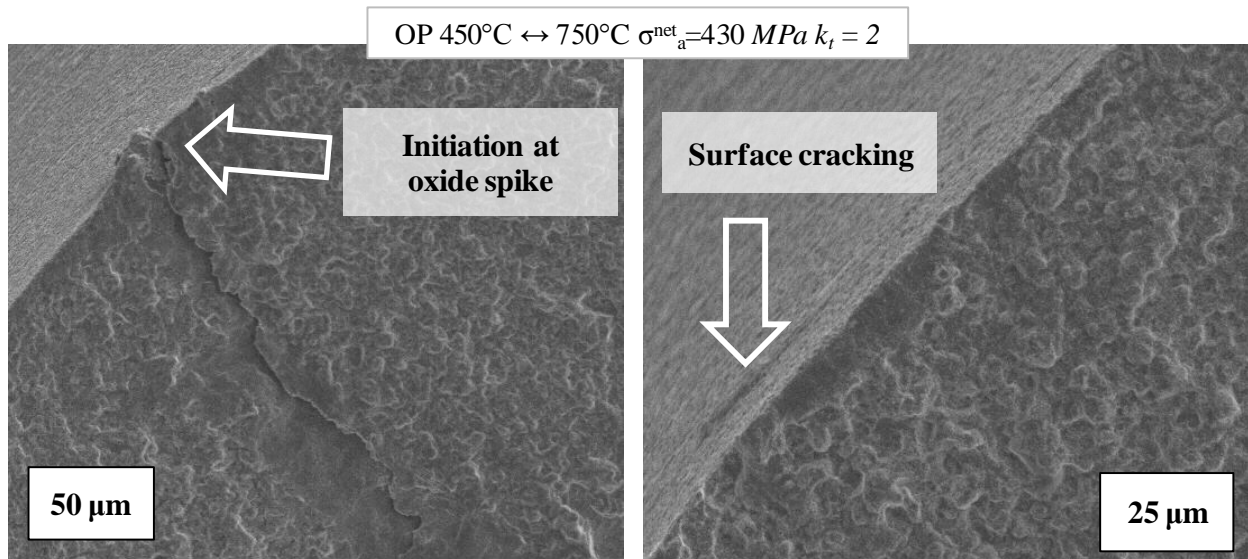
IN100 450°C-750°C,  $\sigma_a = 430 \text{ MPa}$ ,  $k_t = 2$ , OP TMF fracture surface showing crack initiation at a oxide spike and secondary surface cracking.
